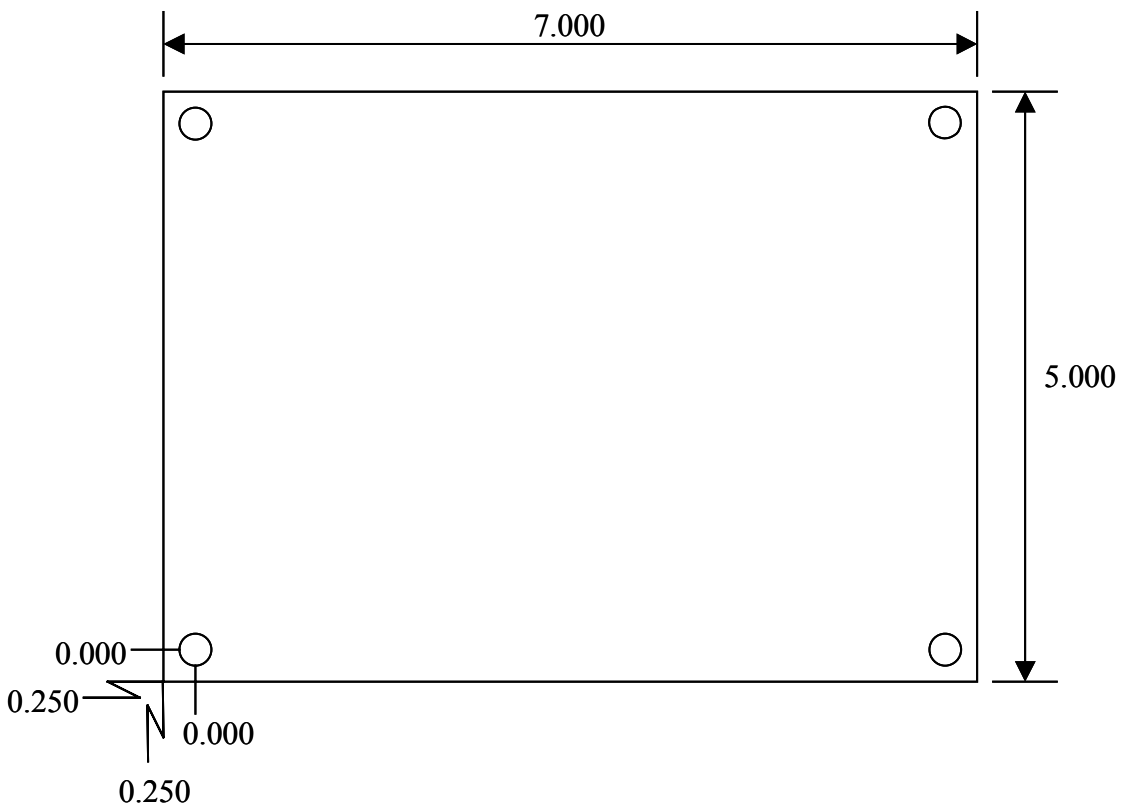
Mechanical Dimensions (Measurements are in Inches)
